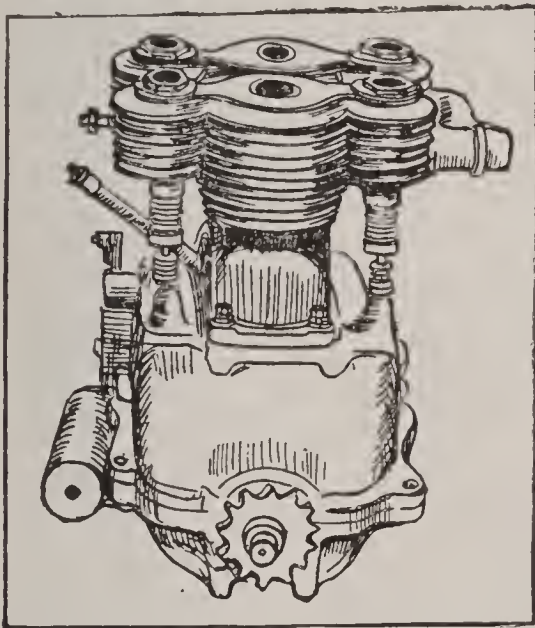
The Triumph Two Cylinder Motorcycle Power Plant, an Unconventional English Design.
